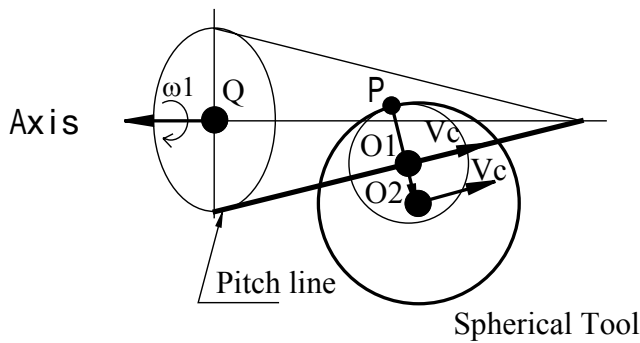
Processing method of mating teeth of WN spiral bevel gear
